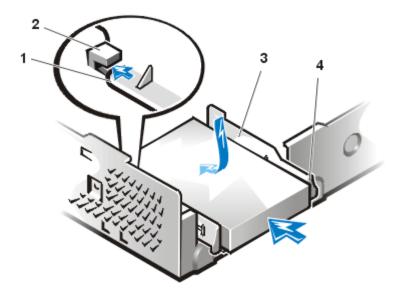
Removing a Hard-Disk Drive From the Hard-Disk Drive Bracket
